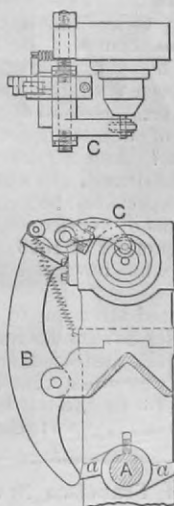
Plan and Cross Section of Knurling Attachment.
